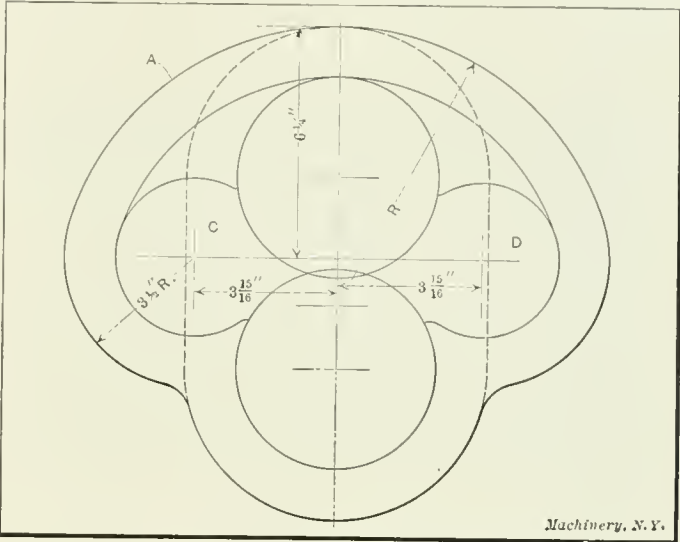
End View of the Hydraulic Brake showing Location of the Cylinders
